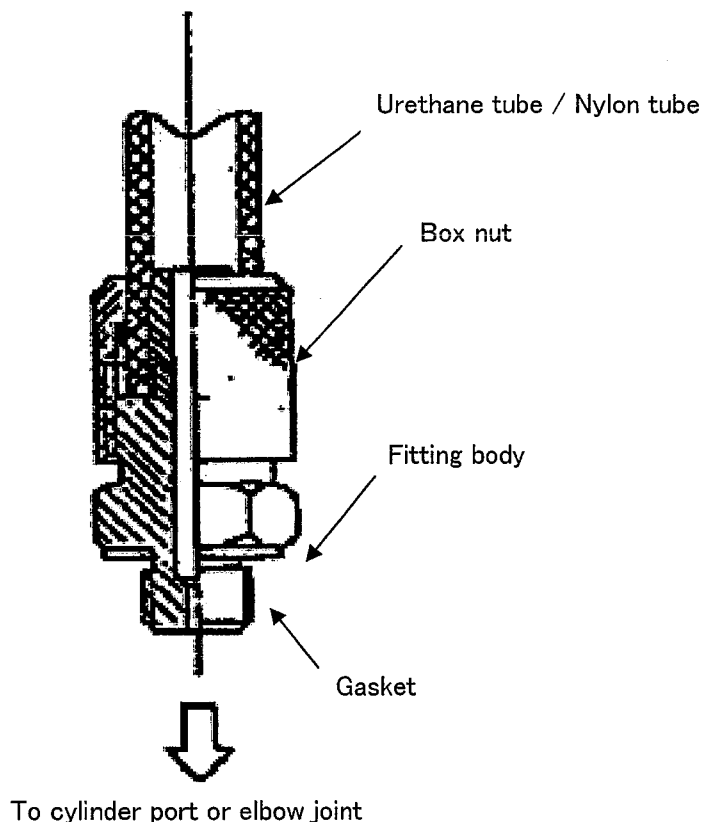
CJ-5H-6 (Tube size of O.D.6/I.D.4)
